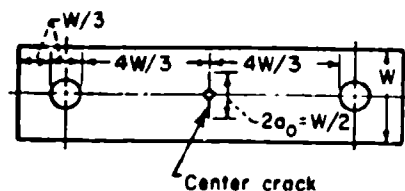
Center-Notch Tensile (CNT) Specimen.
